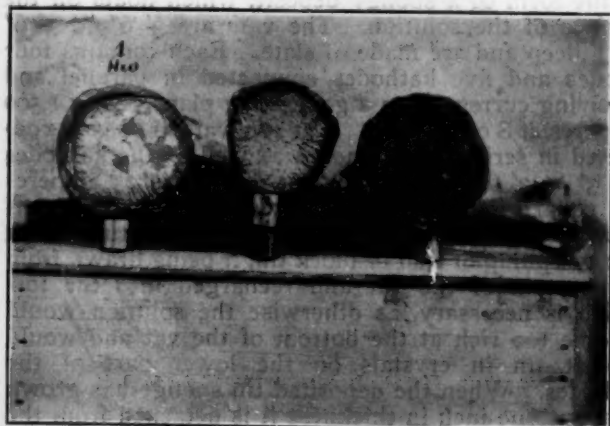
GUN METAL RUNNER HEADS IN ORDER OF CASTING.
